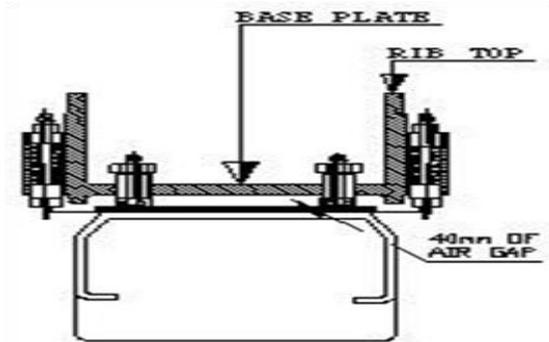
Coke Oven door cross section view-old, designed door diaphragm
